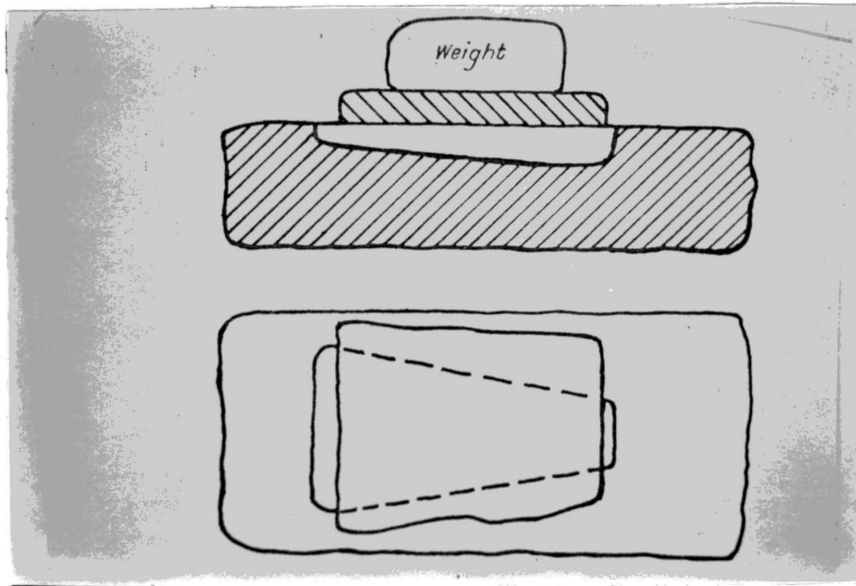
, An "open" Axehead Mold with Weighted Cover,
